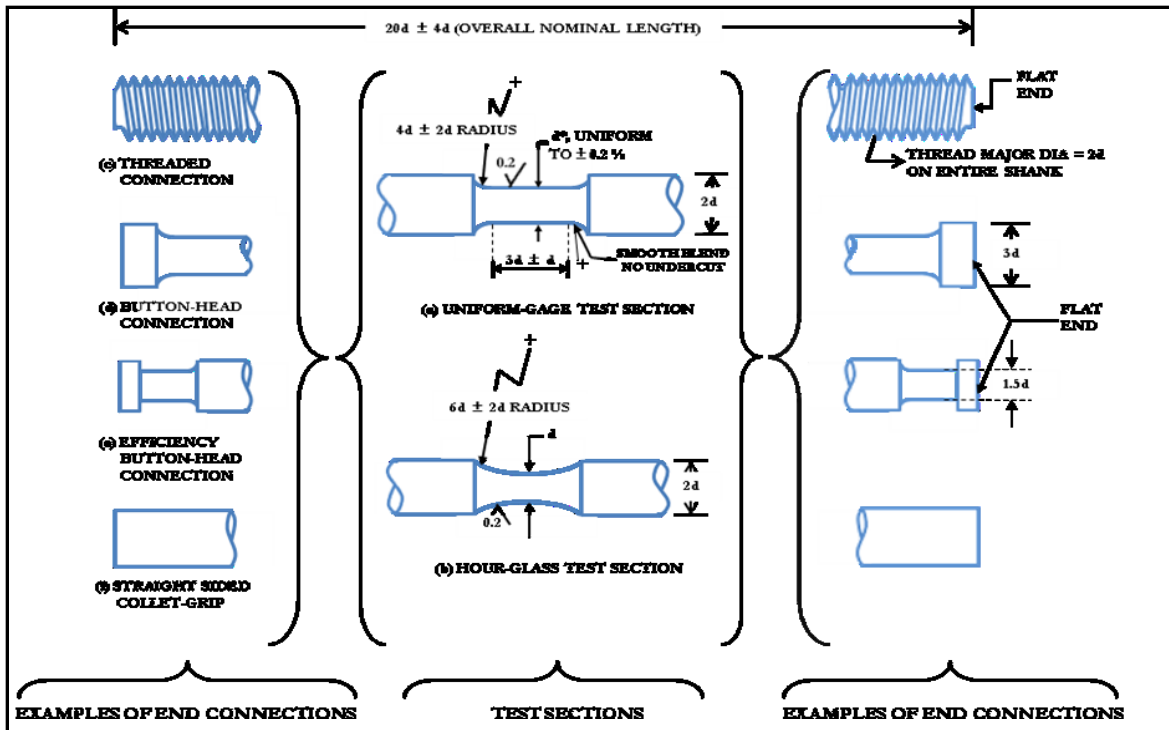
Test specimen configurations for C-F testing as recommended by the ASTM C-F test standard, E2714-09 [31].
